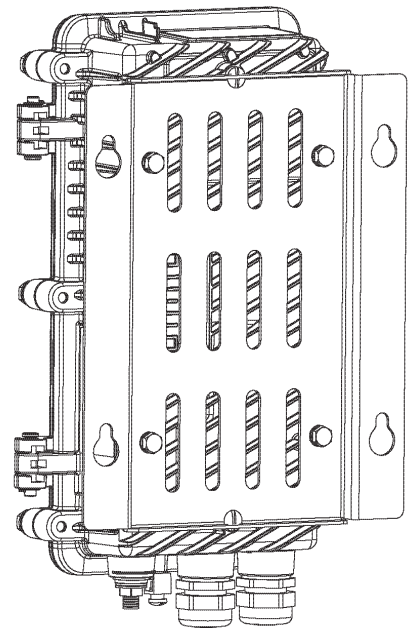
, SMG-HP and Bracket ready for surface mounting
